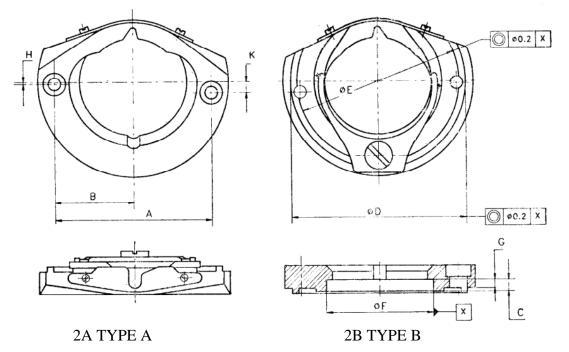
DIMENSIONS OF CLOSED-TYPE SHUTTLE RACE
